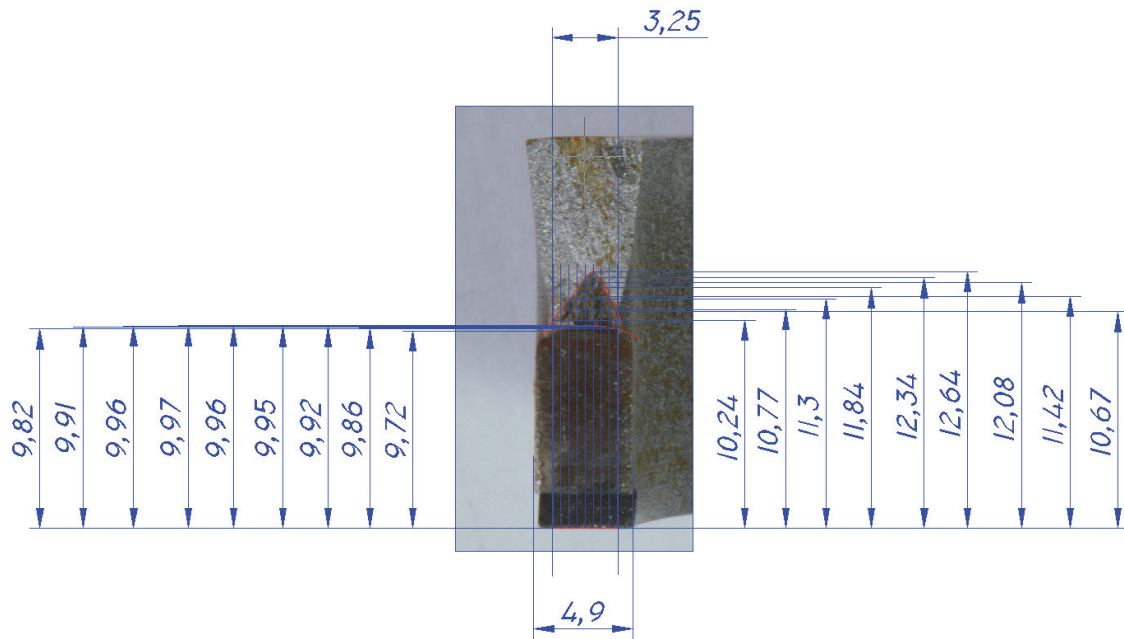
Determining the crack length on fracture surface and enlarged view of the crack front - example: specimen SL(89T)-17
